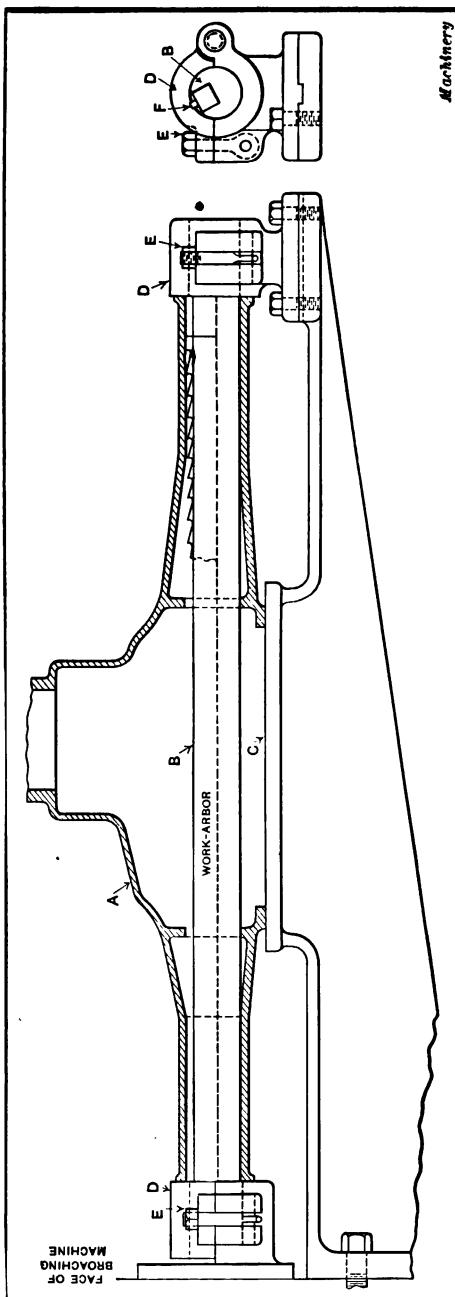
Finishing the Inside Surfaces of Bosses *B* on the Broaching Machine
